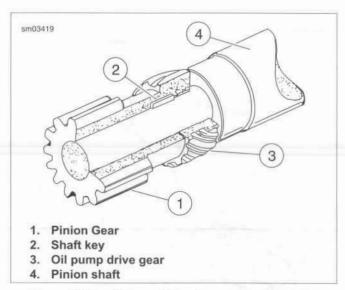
Oil Pump Drive Gear and Pinion Gear Installed on Pinion Shaft
